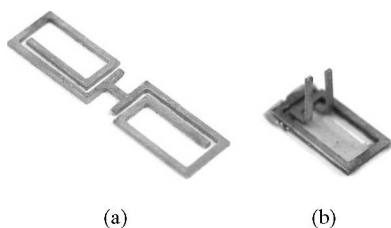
Inductance cancellation winding photographs of single-layer pattern and final two-layer construction for the 330 nF integrated filter element. (a) Cut pattern. (b) Final assembly.
